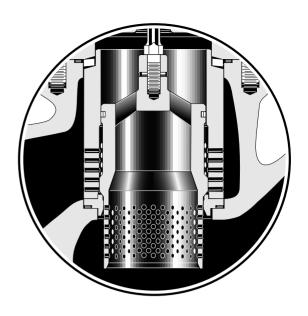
Valve equipped with a LO-DB cage and a plug having a multihole skirt for pressure expansion double stage (type 41•12-2B)
